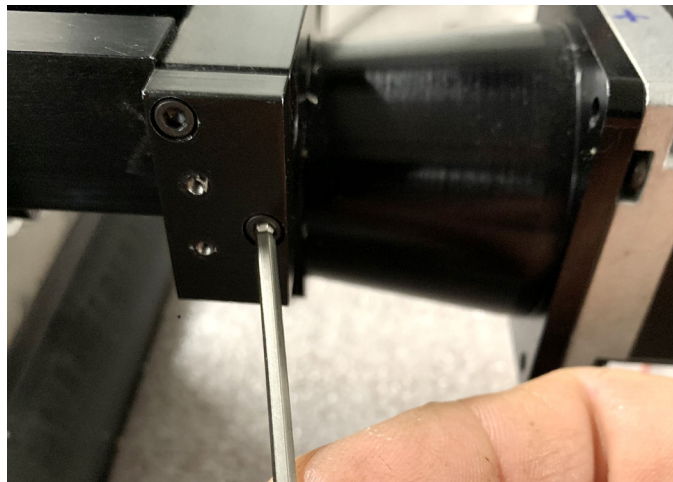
Attach the X-axis limit switch mounting bracket, P/N 68026, using the two 8-32 screws.
